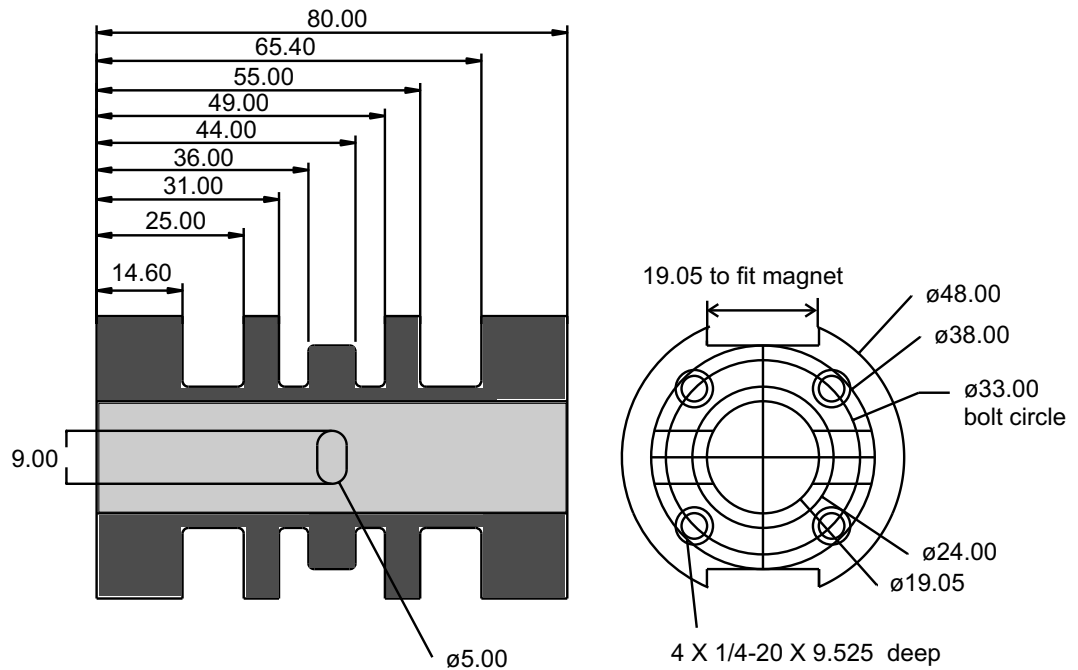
Machine drawing of the Boron-nitride HIP-trap form.(all units in mm)
